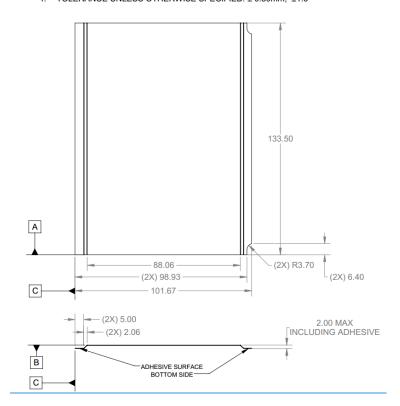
Large Card Bottom Side Insulator (<u>Top and Side View</u>)
